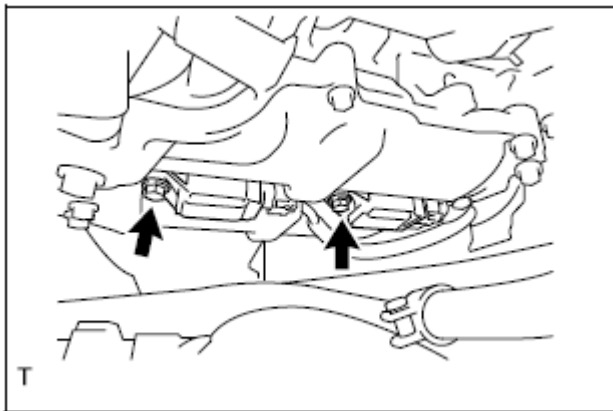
Identifying Ignition Coil Assembly Mounting Bolts (Bank 2 Side)
